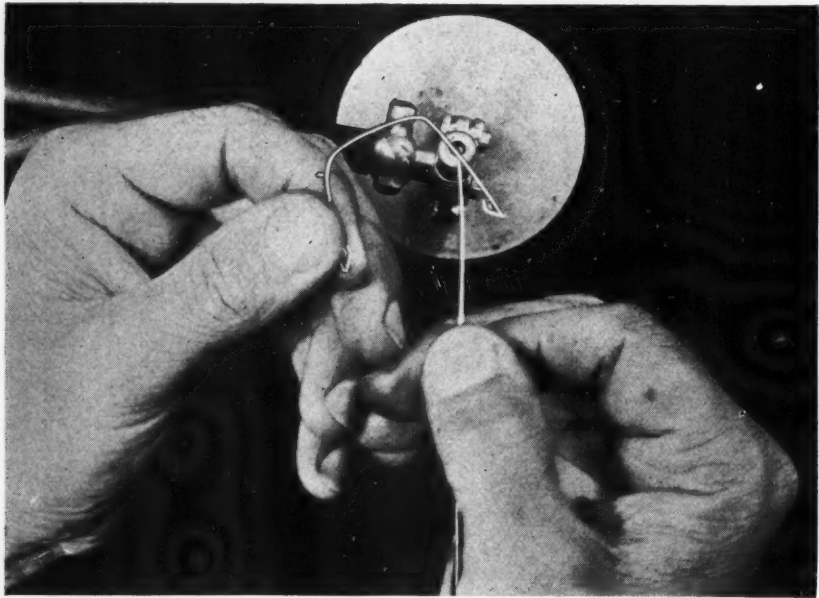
Placing 14K. solder on the body wire for attachment of auxiliary spring.
